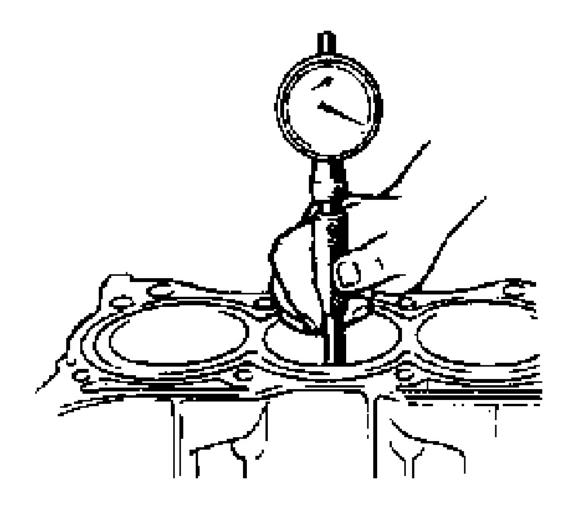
Checking Piston Clearance Courtesy of SUZUKI OF AMERICA CORP.
